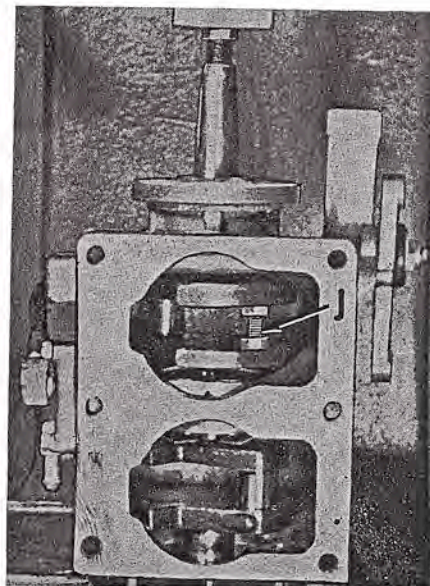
When pressing out the crankshaft assembly, place a jack (J) between counterweights of upper crankpin as shown.
